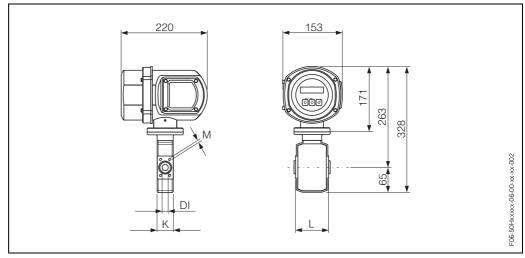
Dimensions Promag H / DN 2...25 (compact version, stainless-steel field housing)
